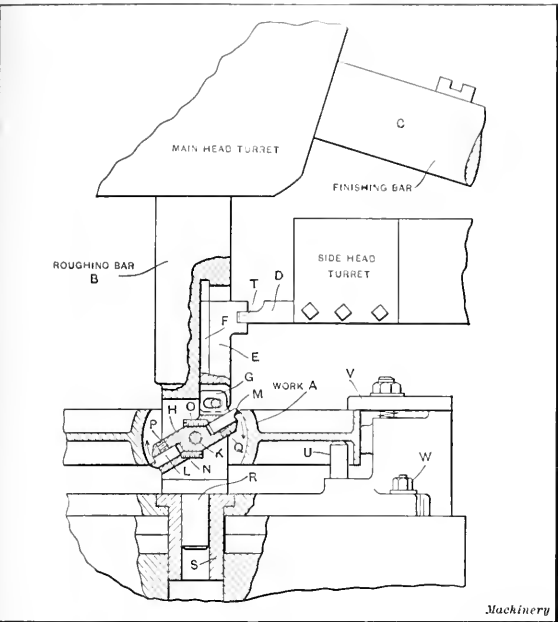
Radius Boring-bar for Vertical Turret Lathe
